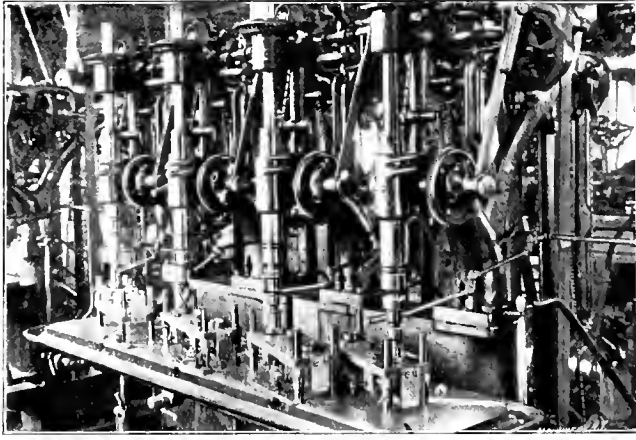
Gang Drill used in Drilling and Reaming Connecting-rod Ends
